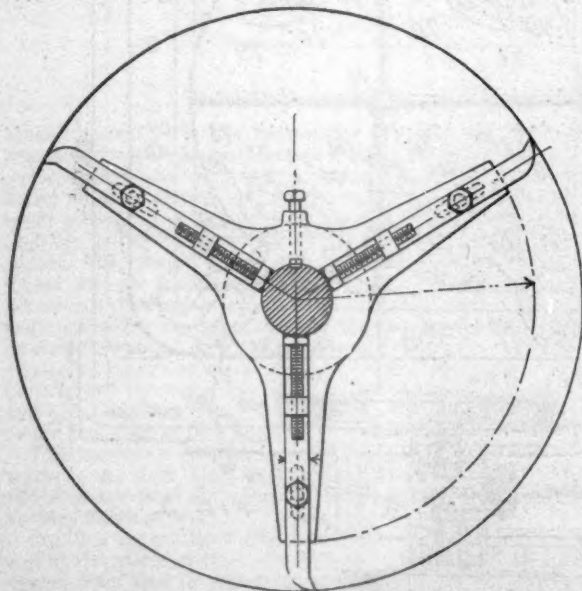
MECHANISM FOR BORING LOCOMOTIVE CYLINDERS.
